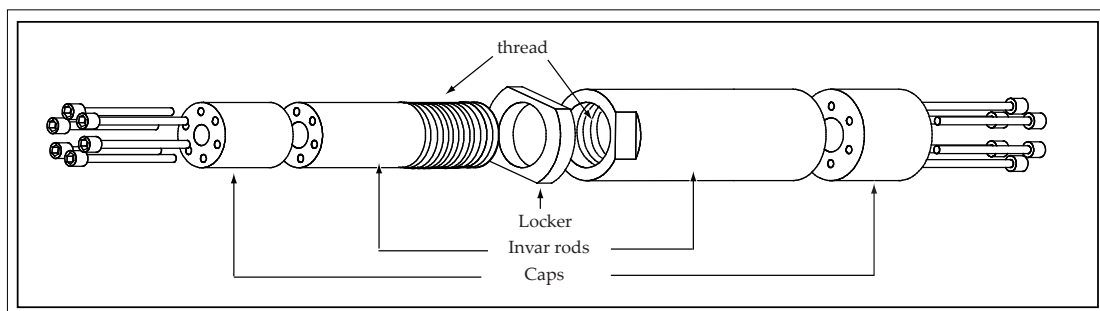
Explosion drawing of the higher order Fabry-Perot interferometer.
